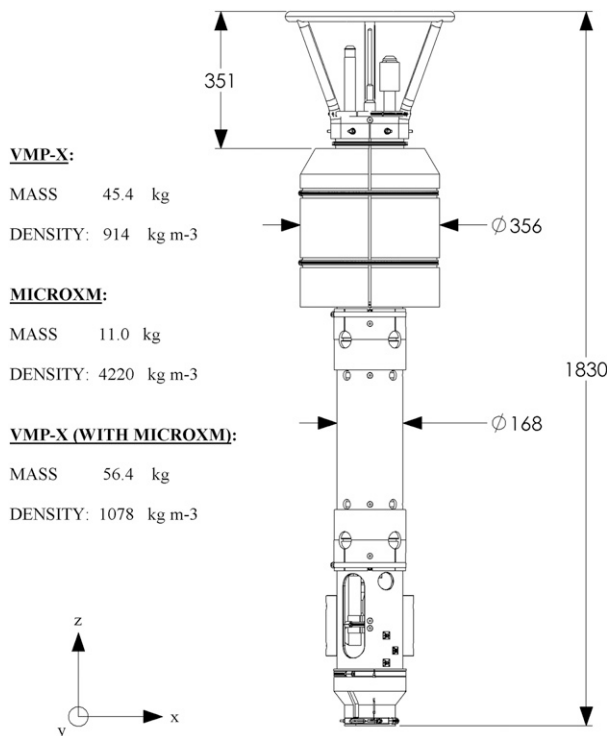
Engineering drawing (mm) of the VMP-X without the MicroXM.
